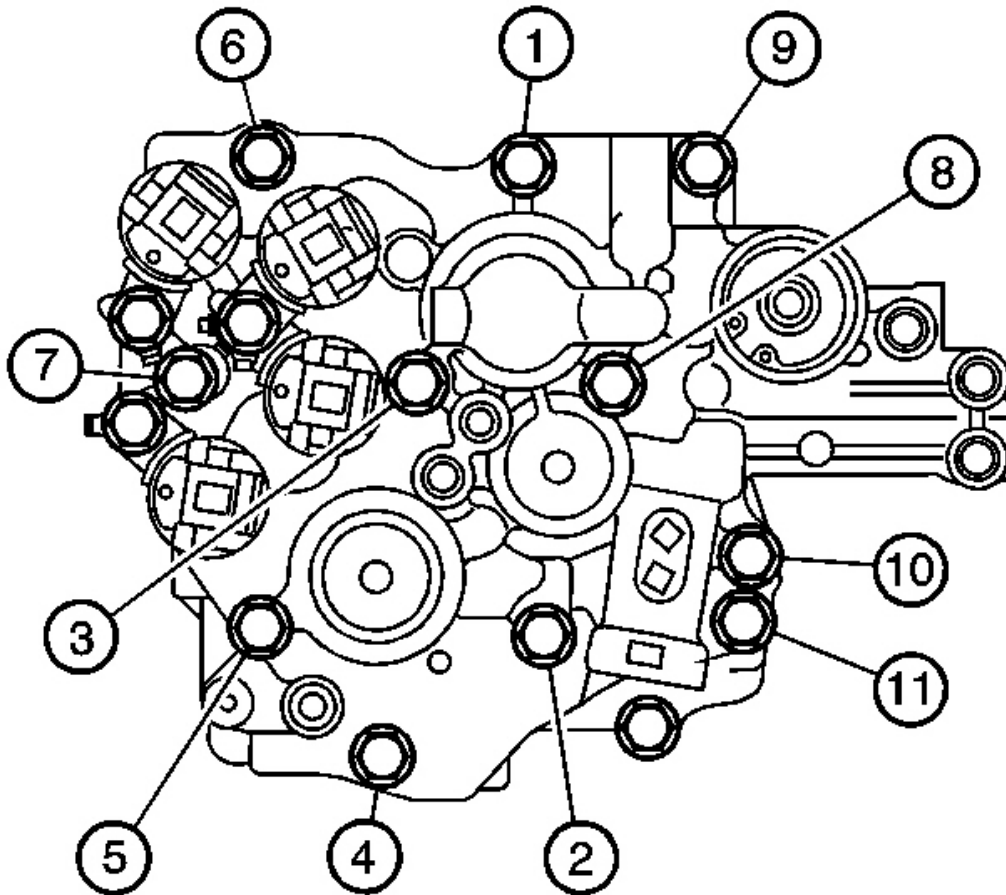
Tightening The Accumulator Valve Body Bolts In Sequence
